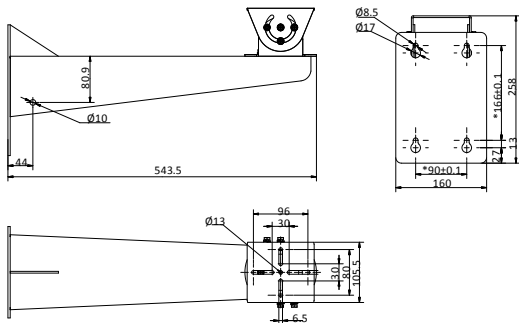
Dimension of a Wall Mounting Bracket Type II (mm)
